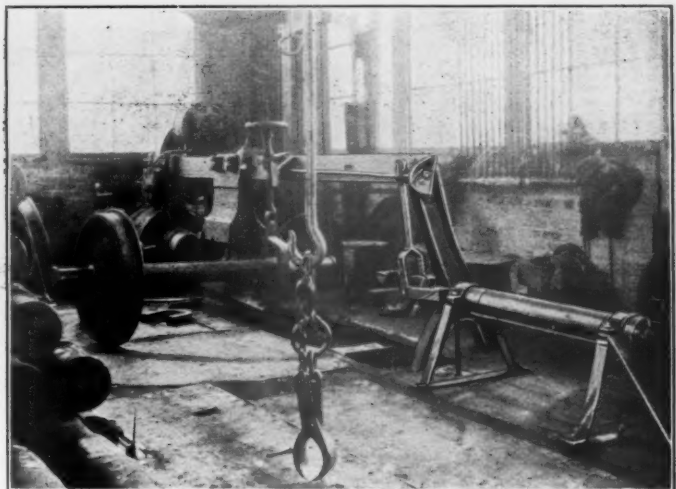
Another View of the Dismounting Press Showing Air Cylinder and Grab Hook
